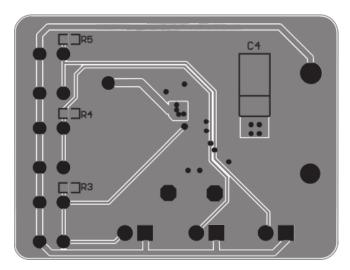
AAT1277 Evaluation Board Bottom Side Layout.
